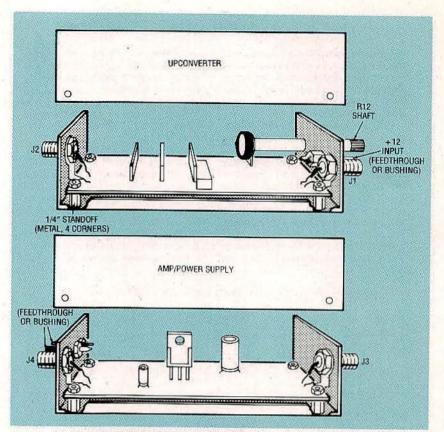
SUGGESTED PACKAGING SCHEMES for the upconverter and amplifier/power supply boards.
